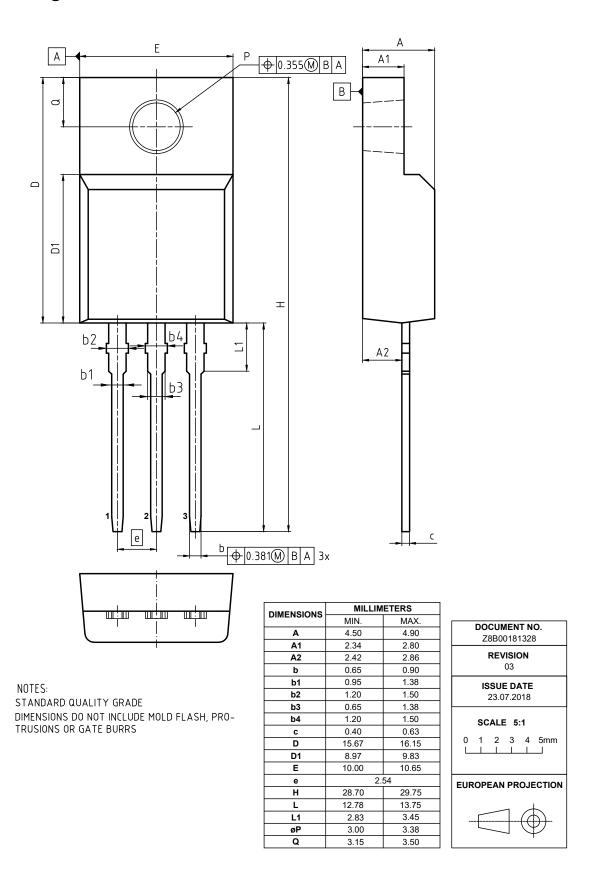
Outline PG-TO 220 FullPAK, dimensions in mm/inches
